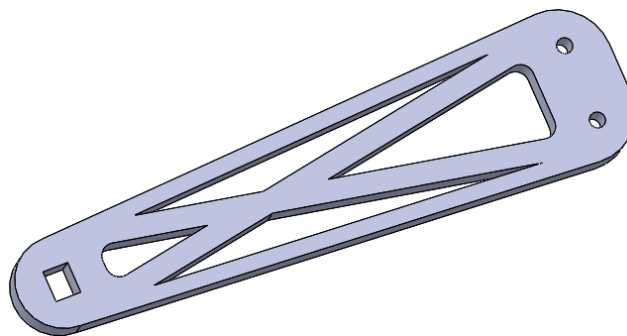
Designed leg of the robot, with mounting holes to hold the wheels in place.
